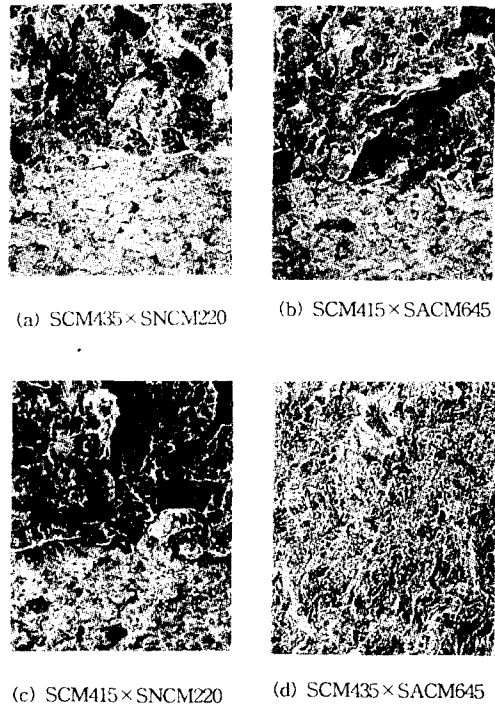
Fractographs of microscopic fatigue fracture surface by SEM ($\times 200$) for dissimilar friction welded joint of ϕ 36 (I.D. ϕ 18) tube to bar
